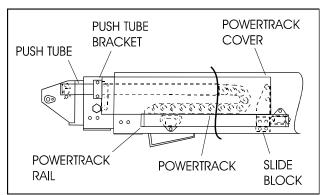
Reassembly of Components - Boom Powertrack Assembly
